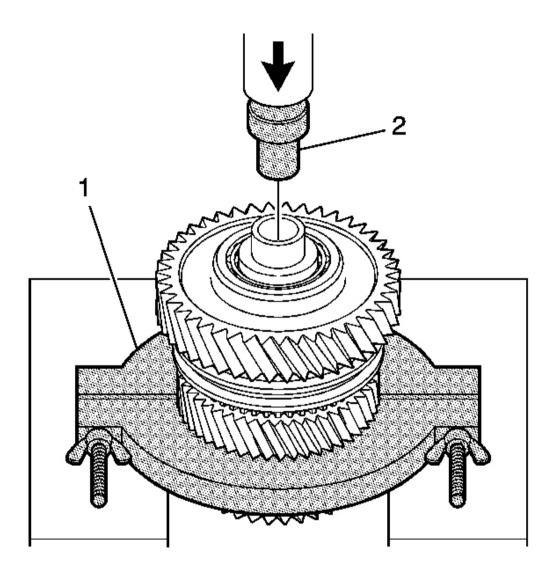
Intermediate Shaft, J 36513 & J 44383 Courtesy of GENERAL MOTORS CORP.
